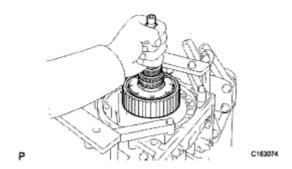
Installing Intermediate Shaft With Rear Planetary Ring Gear Flange And Rear Planetary Ring Gear
